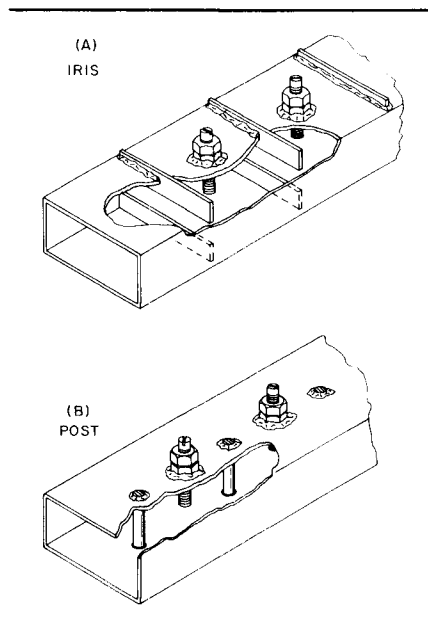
The drawing at A shows a cutaway view of an iris-type waveguide filter. The drawing at B shows construction of a post-type filter. The post-type filter proved to be easier to build and adjust.
